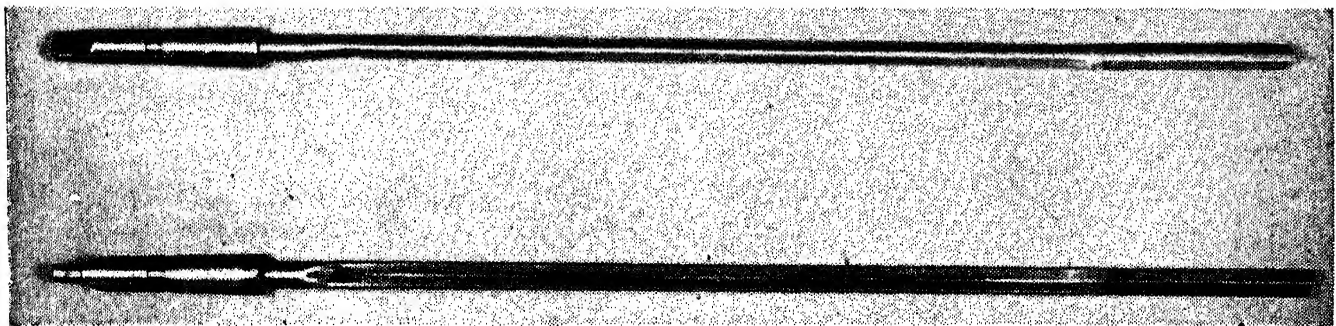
Two views of a typical single flute deep hole gun drill.
